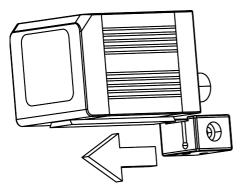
Assembly VISOR® - Mounting bracket MK 45
